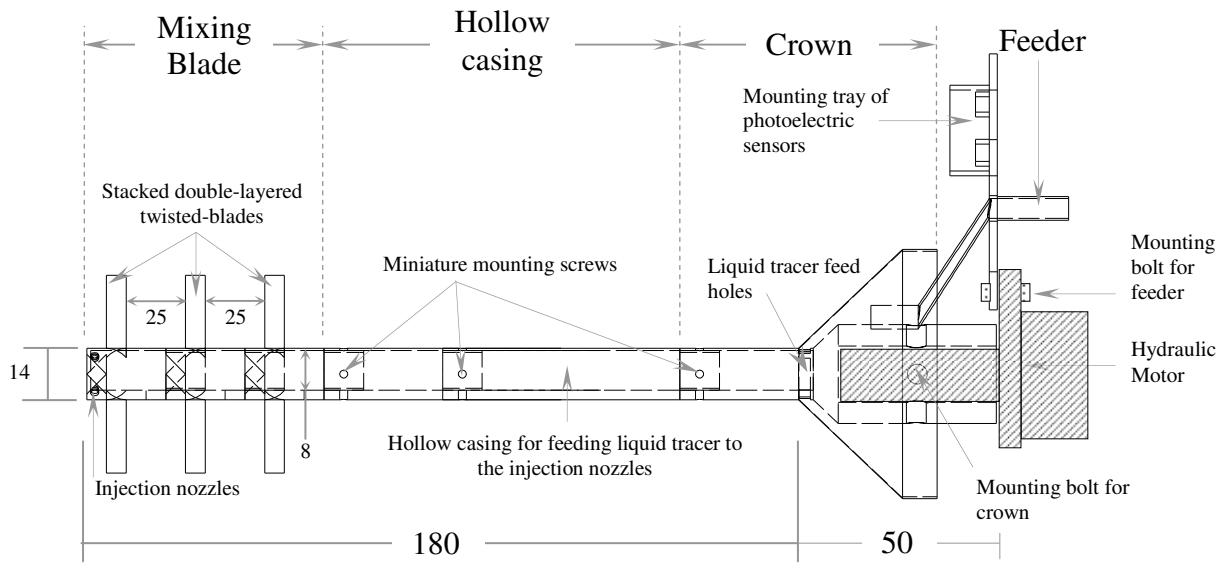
Schematic of in-flight DM installer C (all dimensions in mm).
